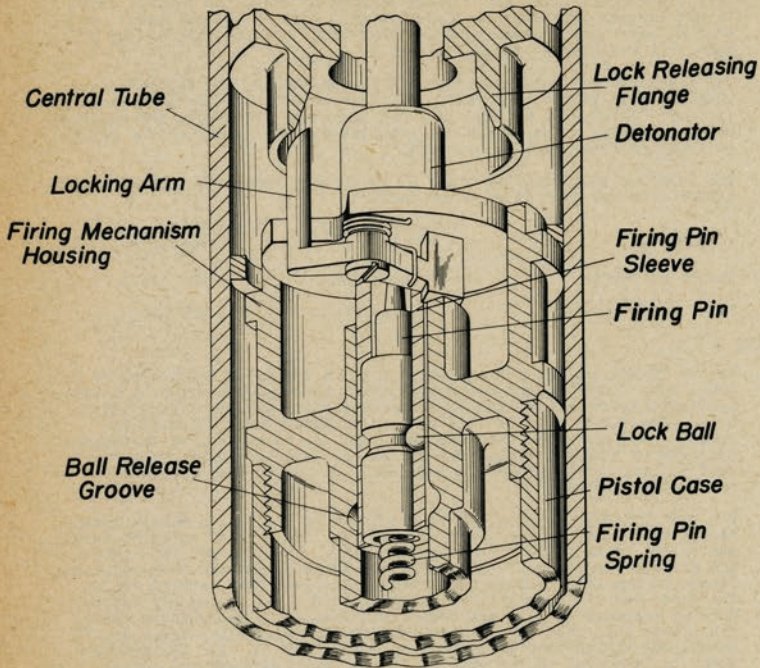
Firing Assembly, Type 95 Depth Charge, Sectional View in Elevation
